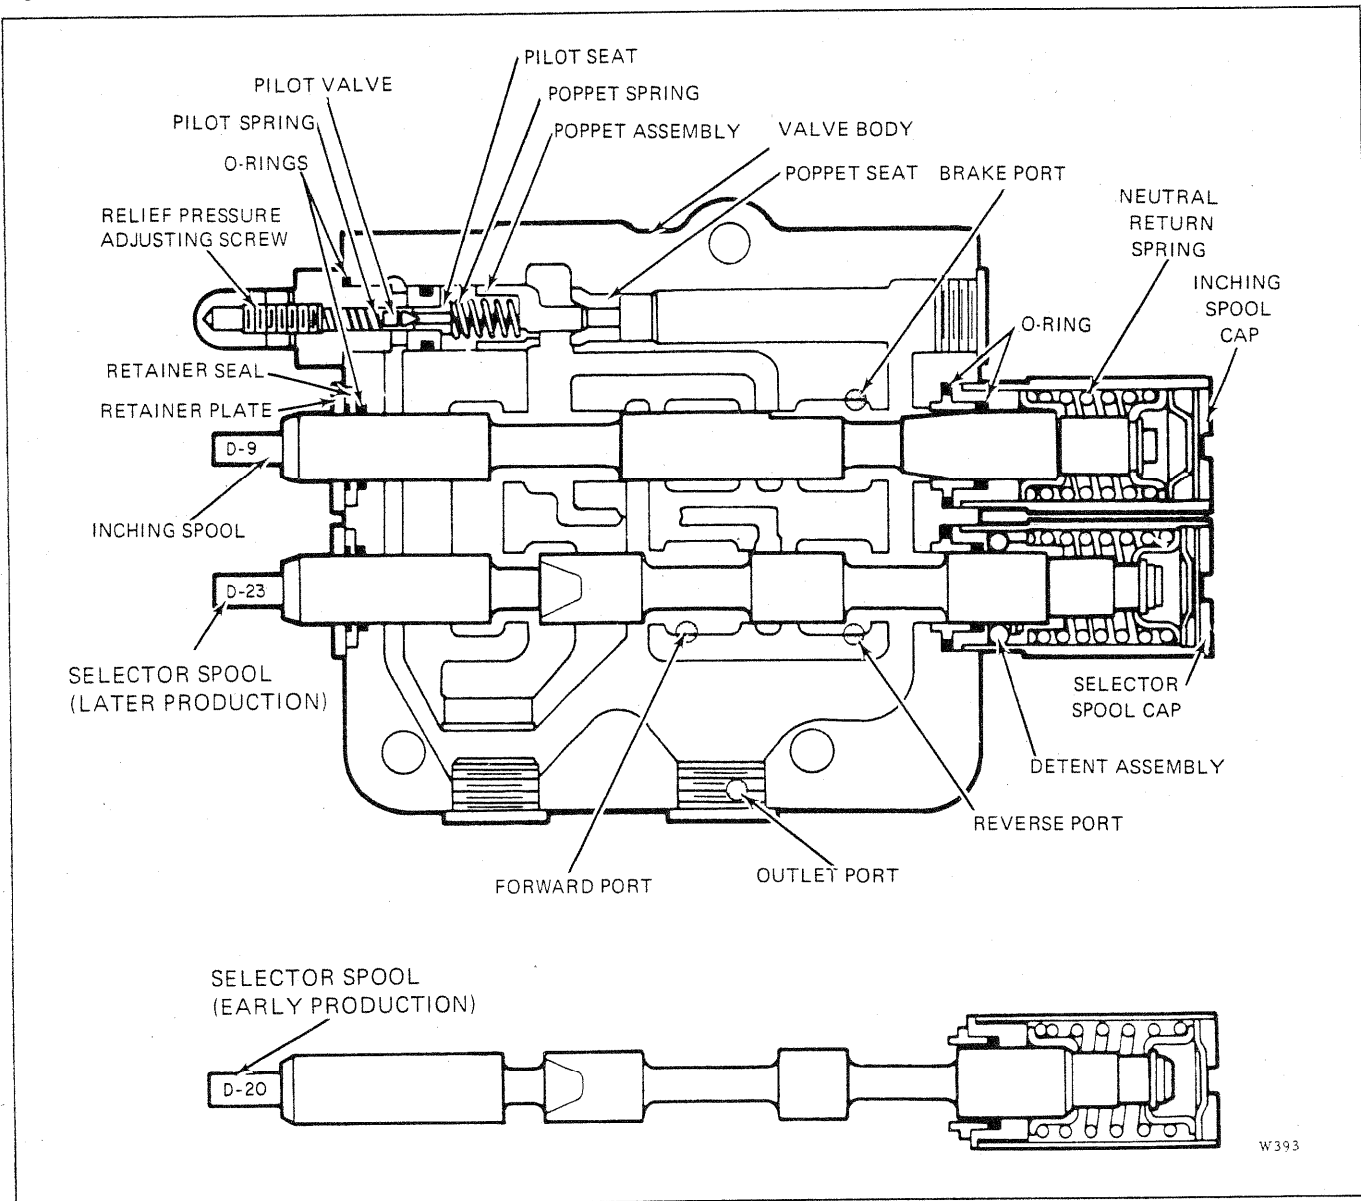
CONTROL VALVE ASSEMBLY, POWER CONTROLLED WINCH
